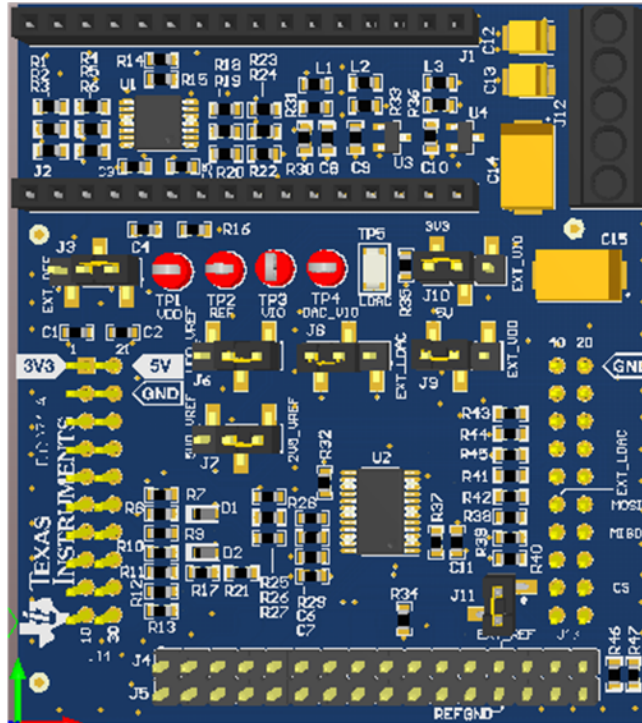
BOOSTXL-DAC-PORT PCB Components Layout
